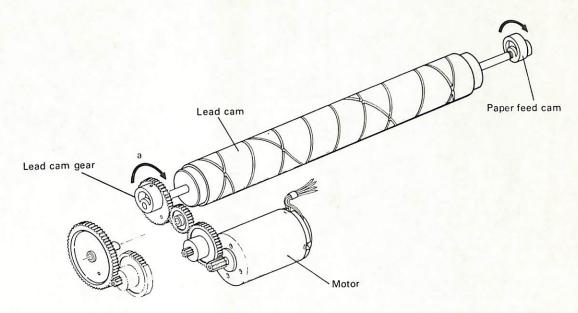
Rotation of Lead Cam Gear and Lead Cam
